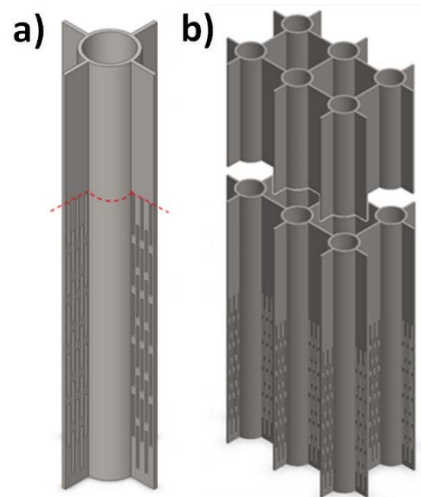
(a) Bottom part of a PHX single tube (dotted line: slits upper edge); (b) some PHX tubes assembled (cut in central zone is for representation purpose)
